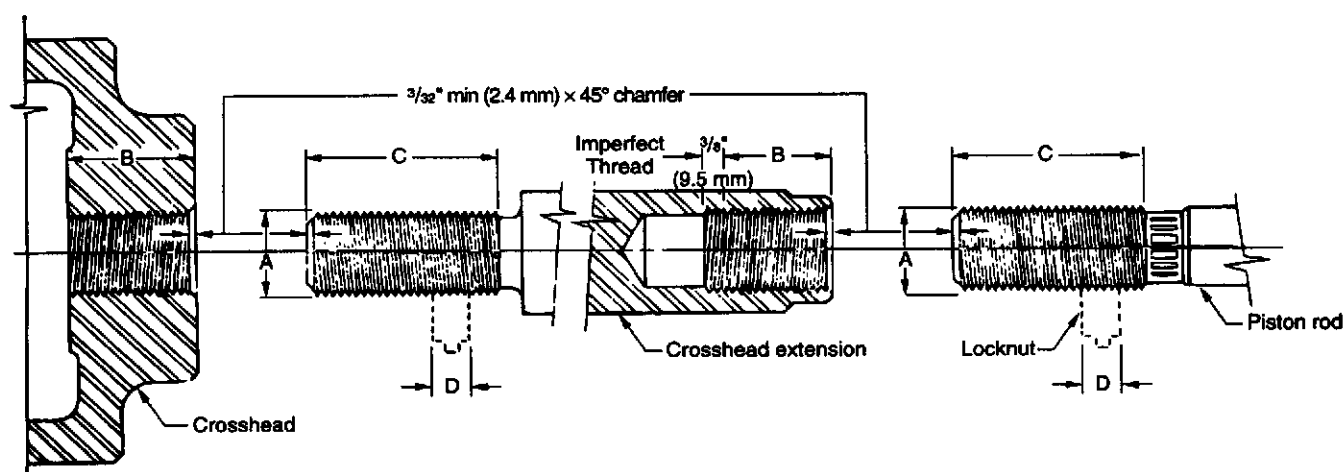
Crosshead, Crosshead Extension, and Piston Rod Connections—Straight Thread Type
